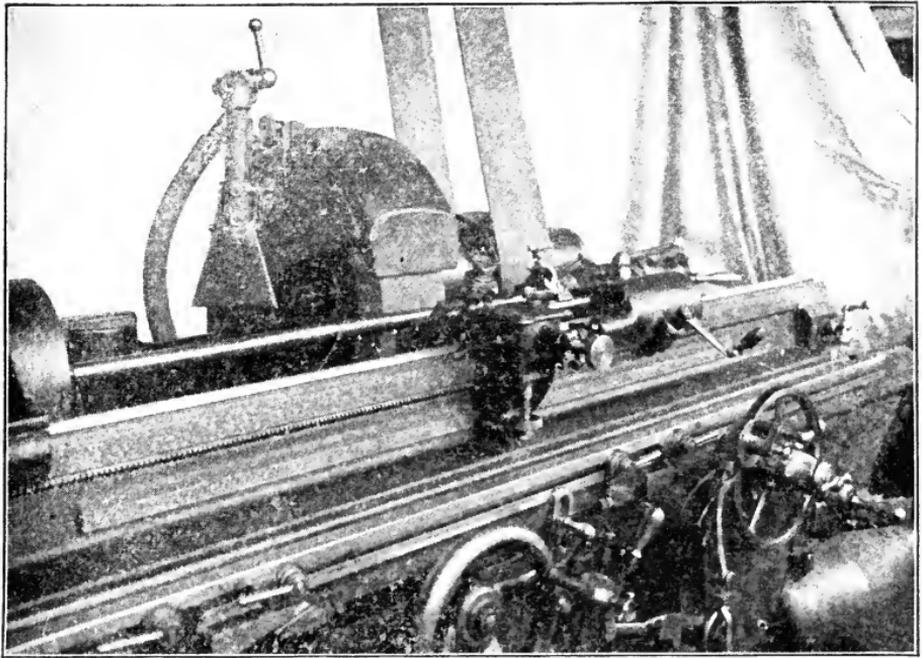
Norton Grinder with 5 1/4-Inch Face Wheel for Grinding Ford Axles and Drive Shafts
